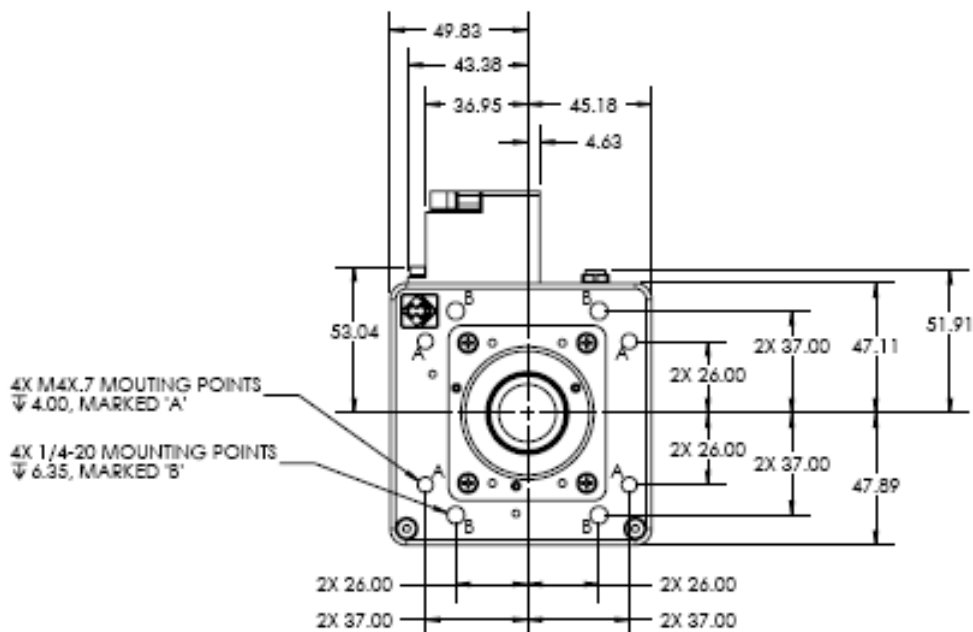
HG-TH Camera Head dimensions and mounting holes, front (in mm)
